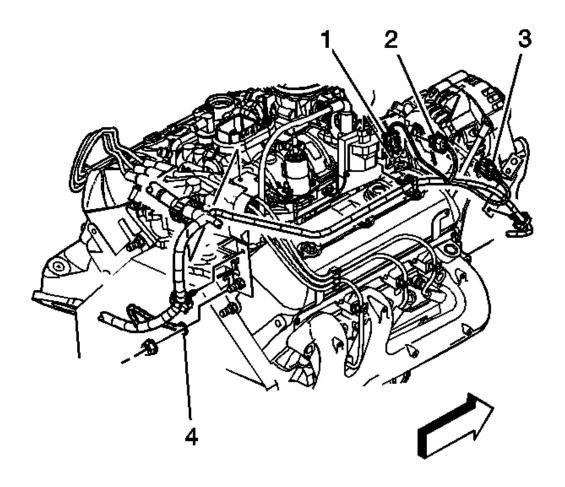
Ignition Coil, Ignition Coil Driver, Ground Nut/Cable & Generator Electrical Connectors
